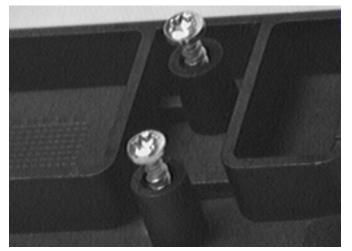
Thread-forming screws used to fasten paper guide to base.
